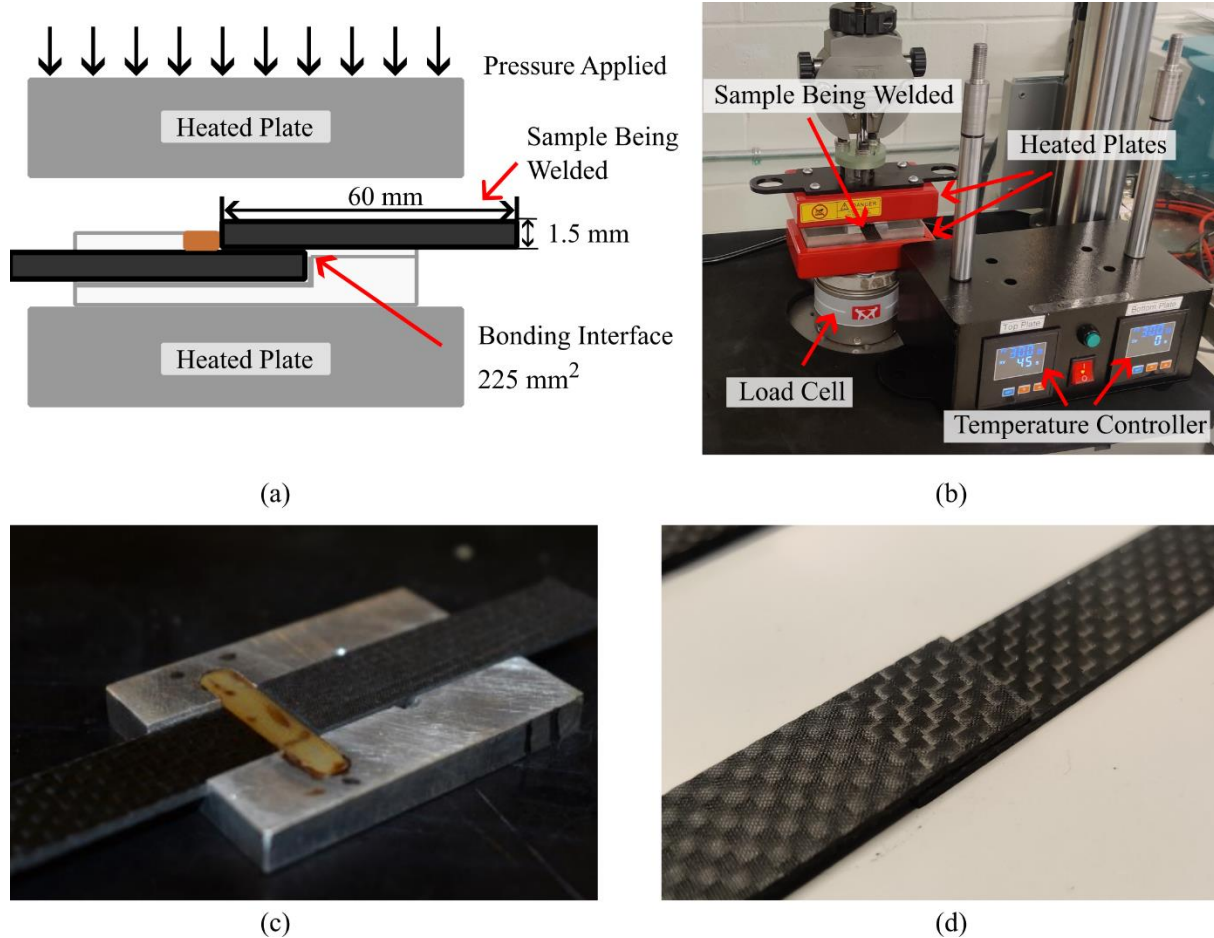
Conduction welding process for joining thermoplastic composite samples. (a) Schematic diagram of the welding process, showing the placement of the lap shear samples in an aluminum fixture between the two heated plates. (b) Actual laboratory setup with annotations showing the load cell used to measure compaction pressure and the temperature controller for the heated plates. (c) Custom aluminum fixture for welding lap shear samples. (d) Image of a lap shear joint manufactured using this process.
